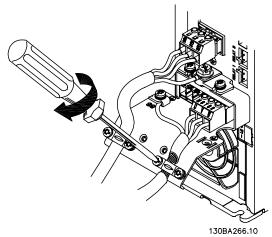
18: Mount cable clamp to ensure 360 degree connection between chassis and screen, note the outer insulation of the motor cable is removed under the clamp.
